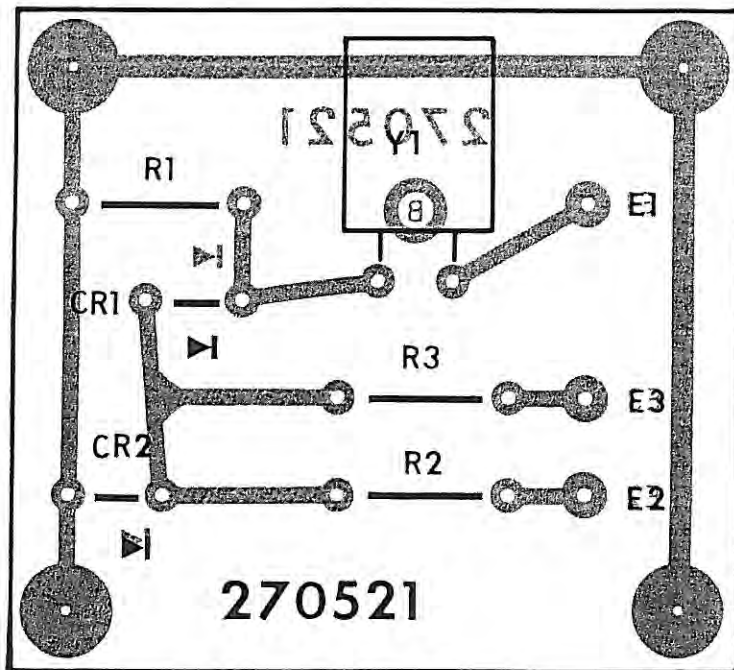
Part 270521-1 Reference Marker Assembly (A2A3A2), Location of Components
